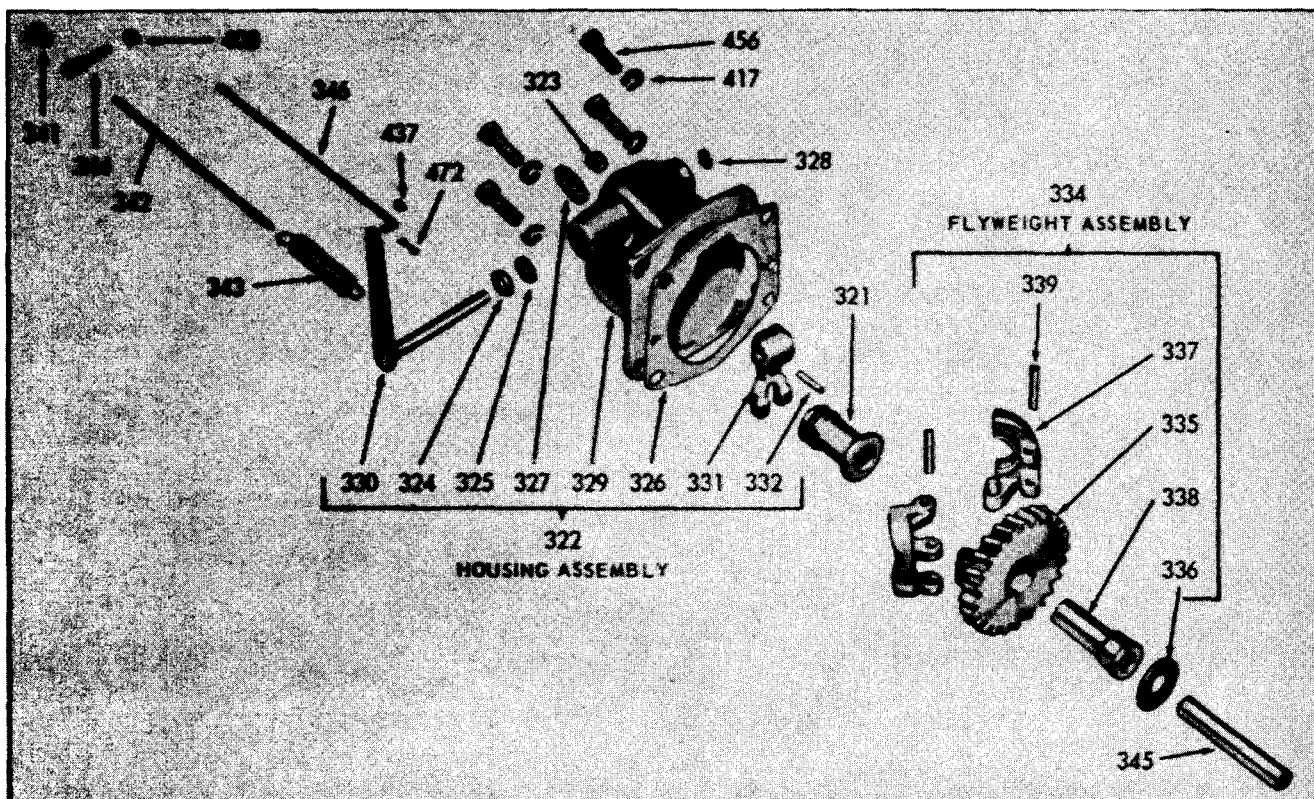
, Ref. No. 320, GOVERNOR ASSEMBLY FOR MIL-E-11275-A ENGINES
